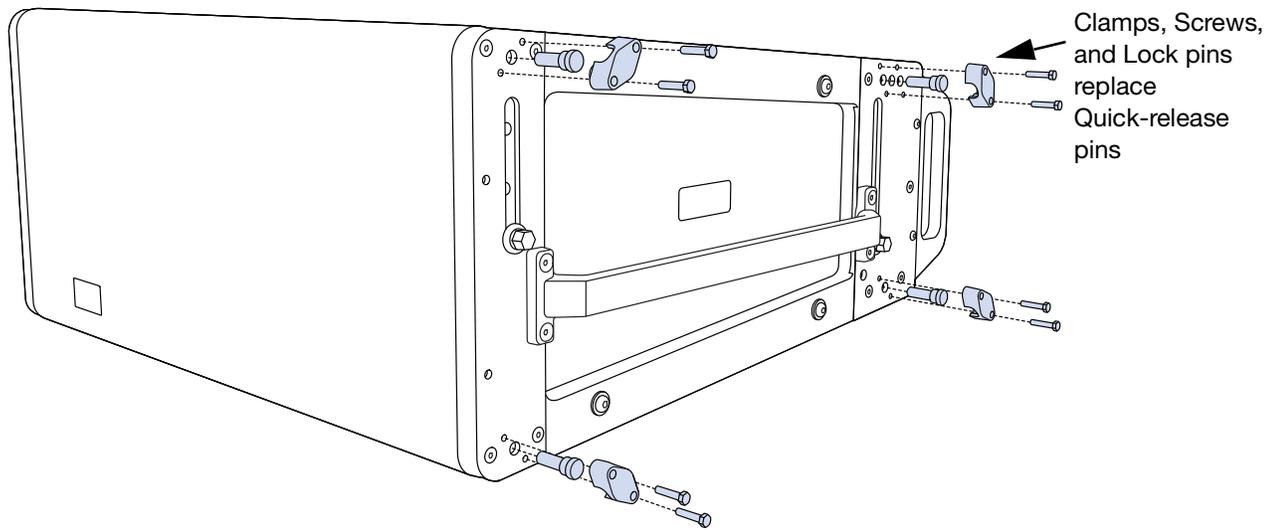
Ultra Weather Protection LEOPARD Loudspeaker Version has Clamps, Screws, and Lock pins that replace standard version quick-release pins
